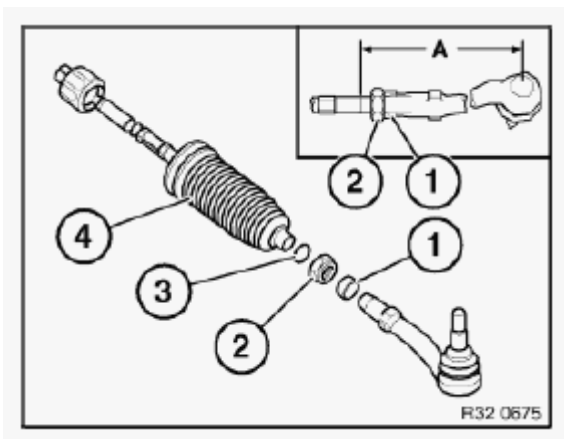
Clamping Ring, Clamping Nut, Clamp And Gaiter
